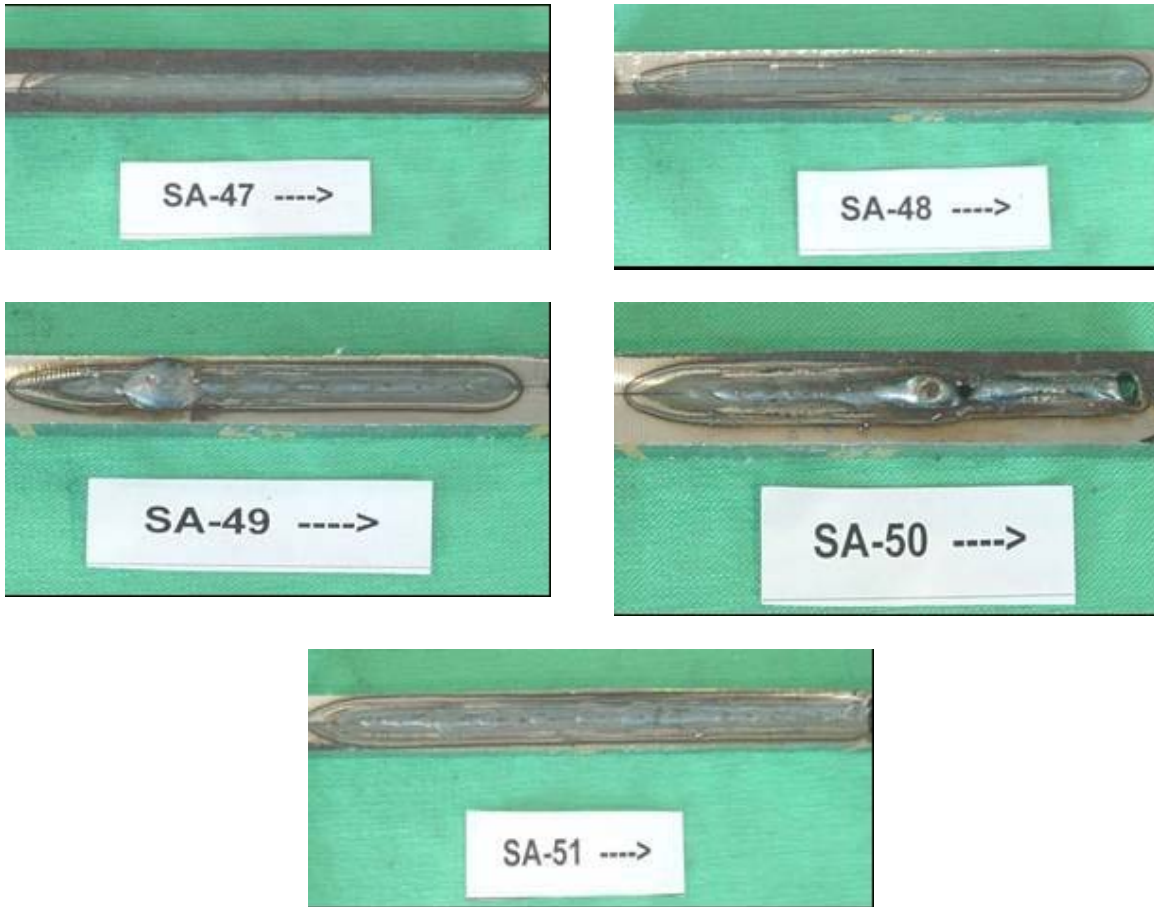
View of Typical Penetration Bead Profiles in Welds SA-47 through SA-51
